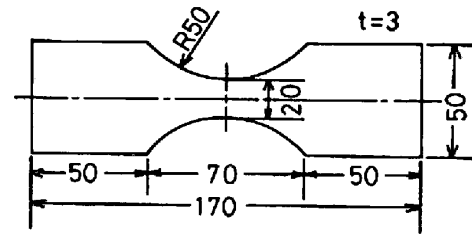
Fatigue specimen used in this study (dimension in mm).
